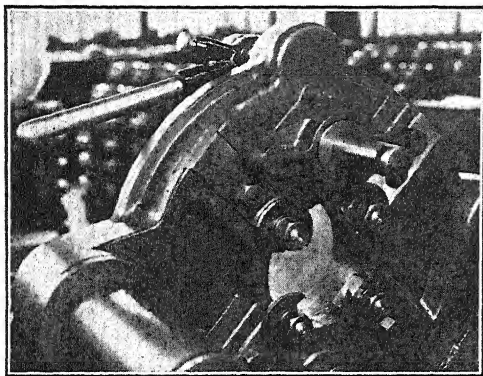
The Cutting Off-Head on the Toledo Pipe-Threading Machine.
